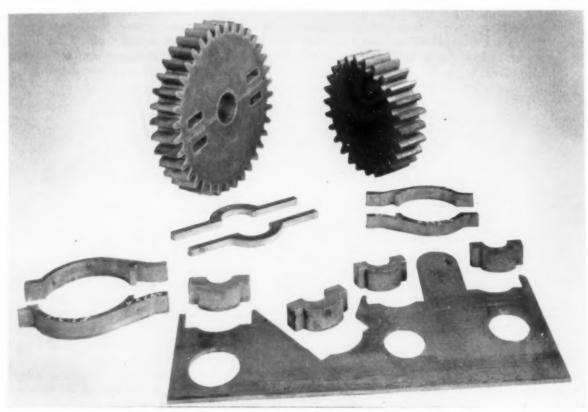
Several flame cut locomotive crane parts. Top, split axle gear and driving pinion. Bottom, machinery side frame.
